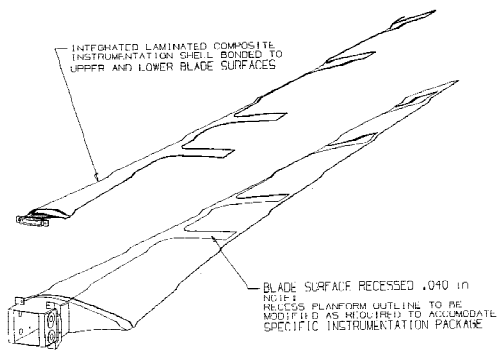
Pressure-Instrumented Rotor Blade Design Approach
